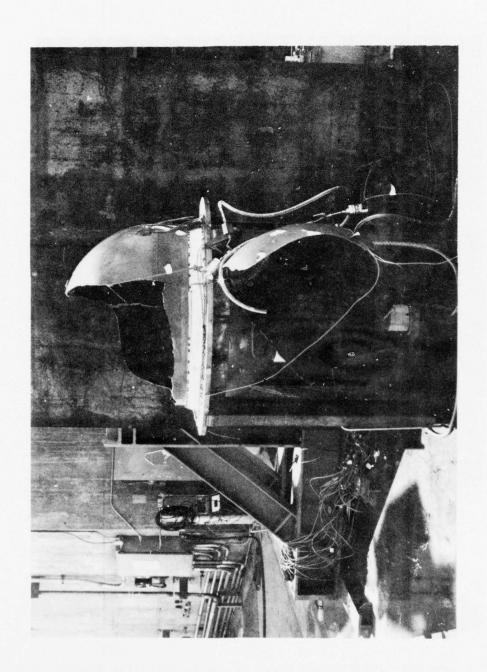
TE-M-364-19 Motor Case in Stand After Testing
